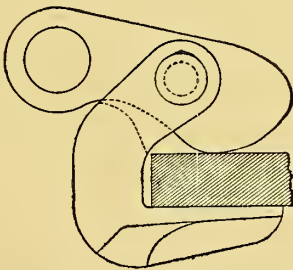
“NEVER SLIP” SAFETY CLAMP FOR HOLDING PLATE.
